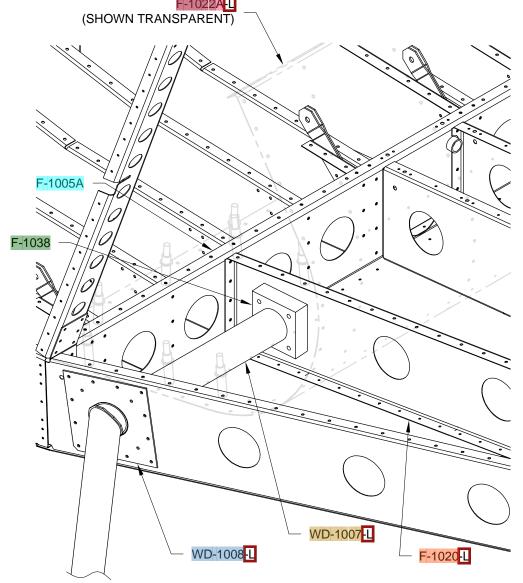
DRILLING THE SUPPORT BLOCK ATTACH HOLES
